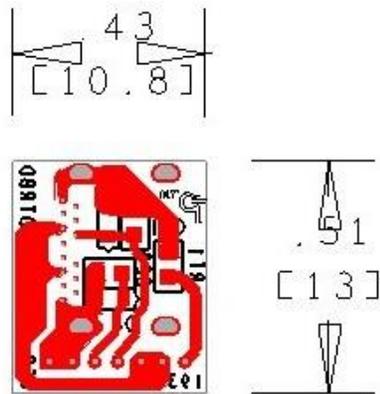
Motherboard Printed Circuit Layout, Bottom.
